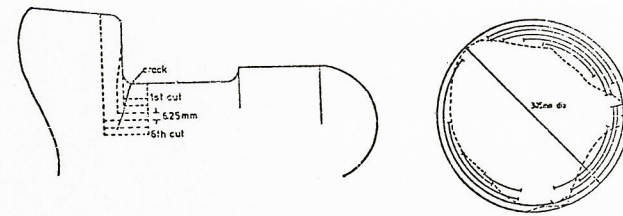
Fatigue crack measurements using A.C.F.M.
